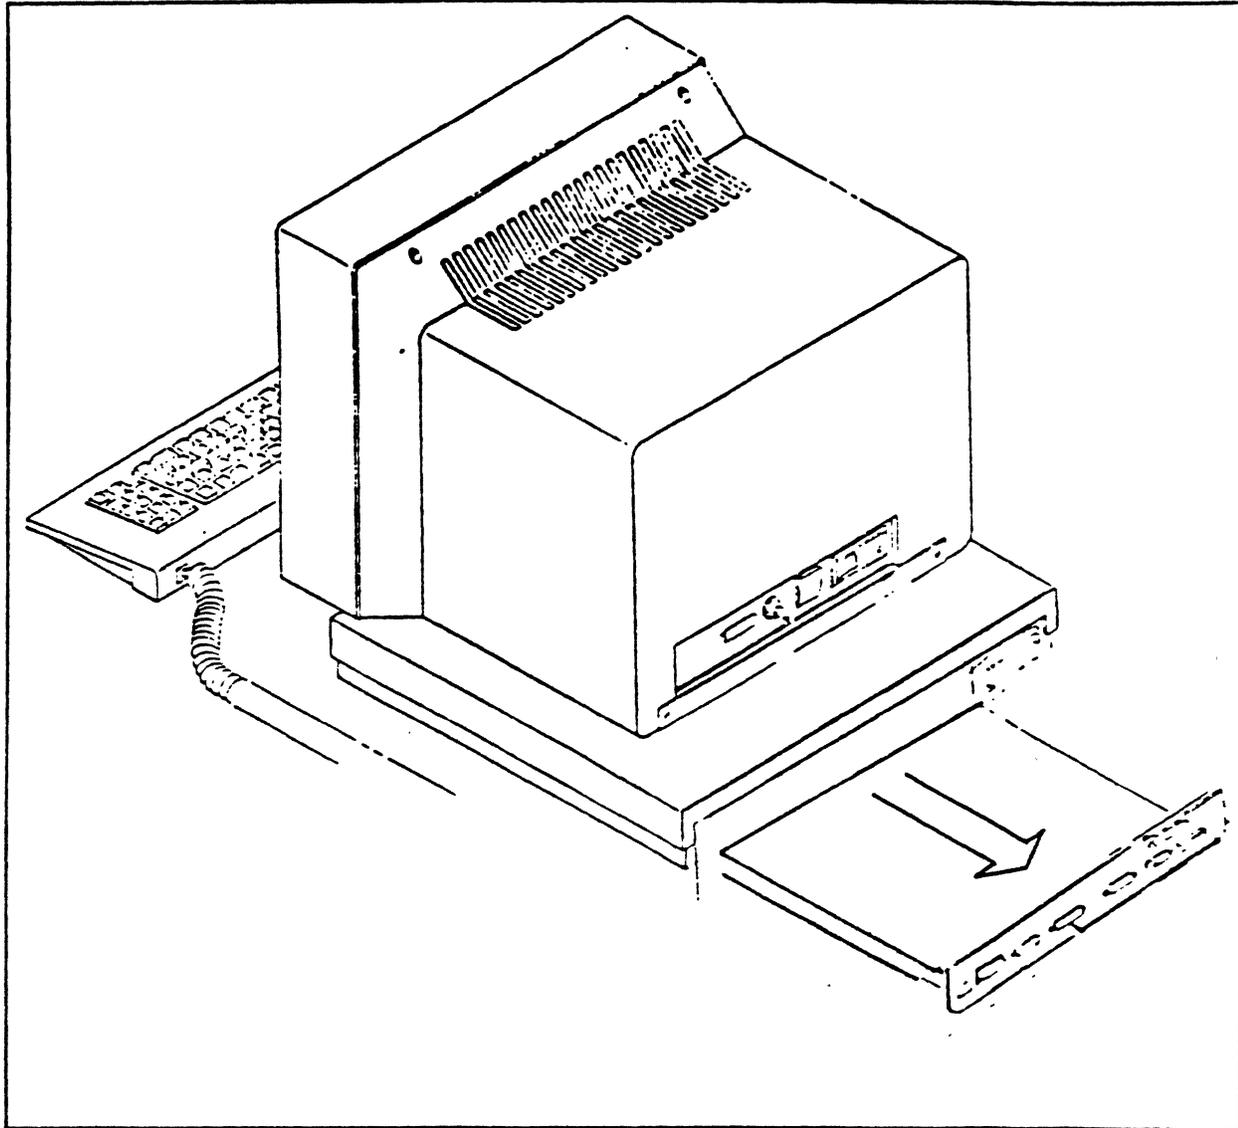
Removing Rear Panel Assembly from Chassis
